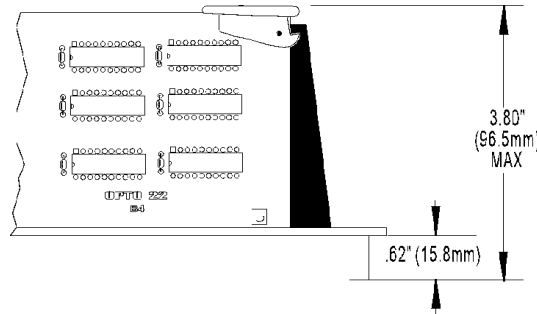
Vertical Dimensions of the B4 Mounted on a Rack
